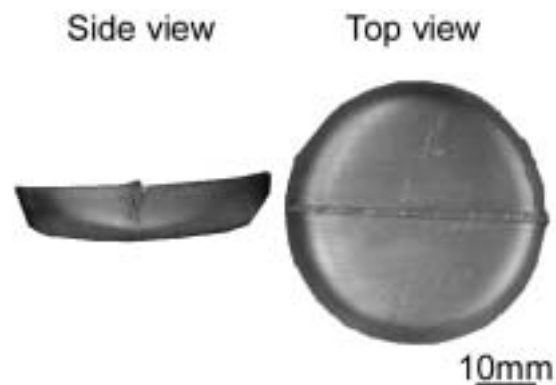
Appearances of drawing test specimen of laser welded joints. (AZ31)
